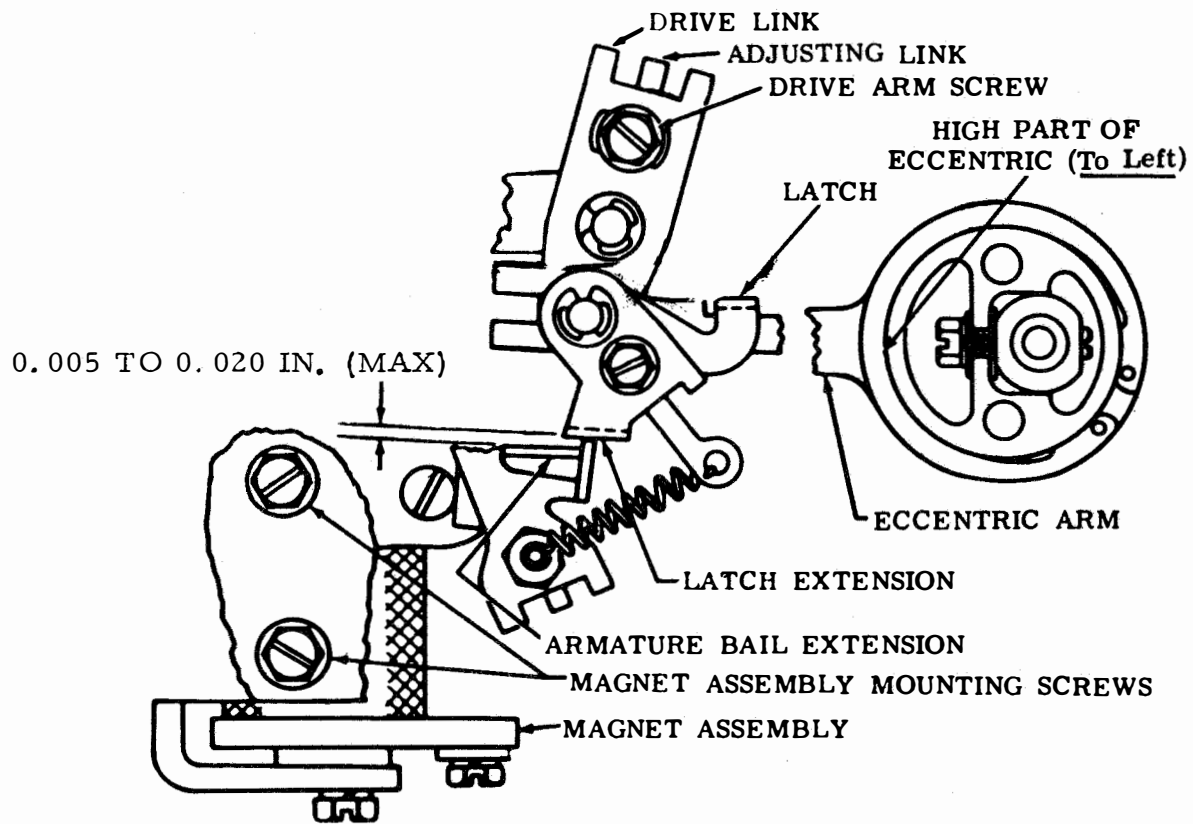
Power Driven Backspace Mechanism Latch Extension, Perforator
